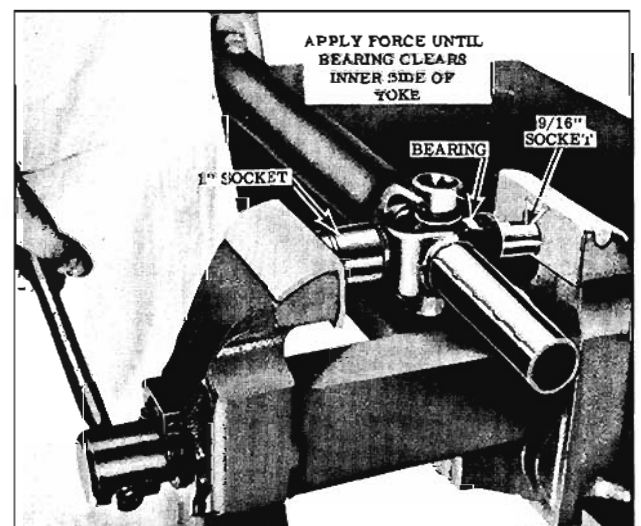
Pressing Bearing From Yoke (Spicer)
